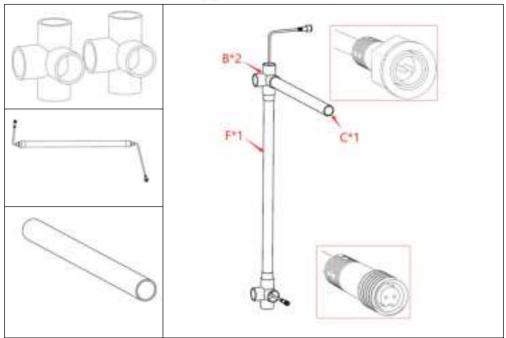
According to the figure, assemble a 355MM long horizontal tube, two 4-way, and 1 lamp together for backup (Note: the lamp wire is in the hole of the 4 barrels.)
